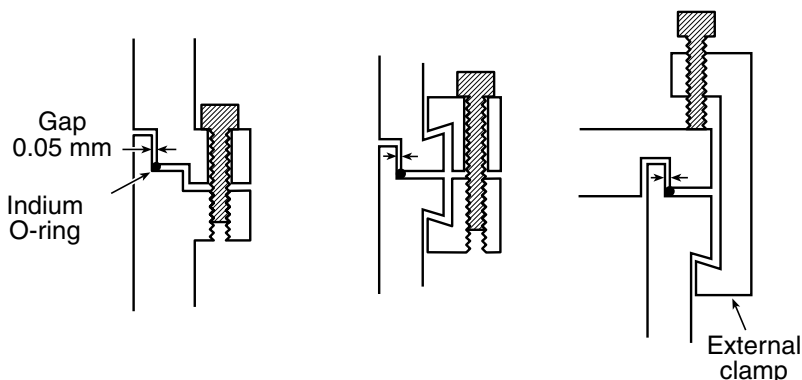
Indium O-ring seal designs. Each diagram is a cross section of just one side of a circular seal. In the first design, a bolt flange is machined into the two stainless-steel tubes to be joined. In the second and third designs, external clamps are used to bolt the two pieces together.
